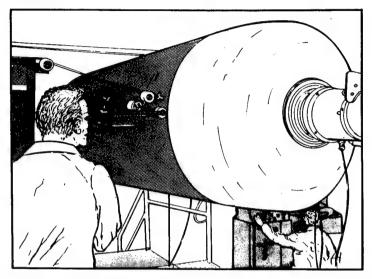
WEI Process for Making Rocket-Motor Insulators
